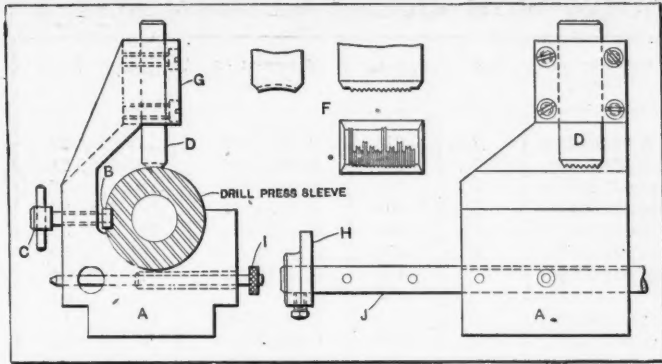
Fixture for graduating Drill Press Sleeves with a Stamp
